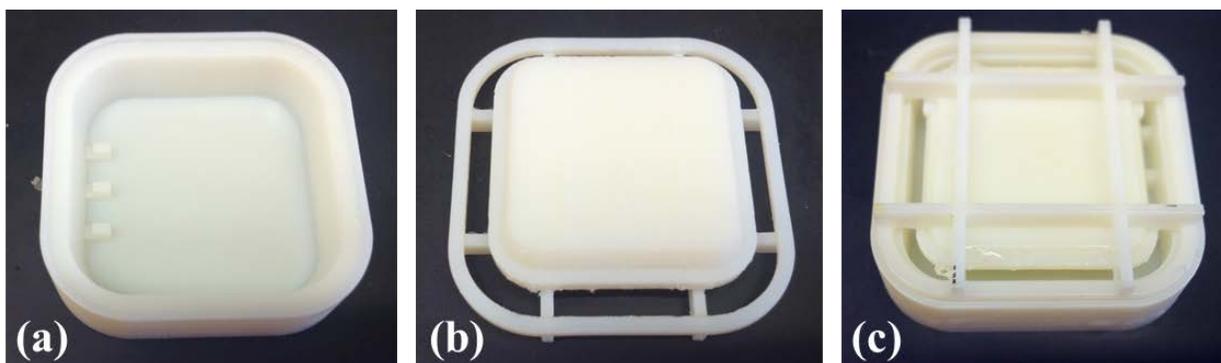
(a) Base mold with pattern for three epoxy connection indentations. (b) Top mold piece to form oil container shape. The surface of this piece is also used to imprint the electrode pattern into the substrate. (c) The two mold pieces assembled and ready to receive polyurethane.
